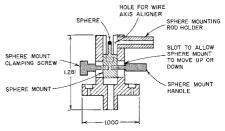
Construction of aligning jig for mounting crystal along [110] axis.
